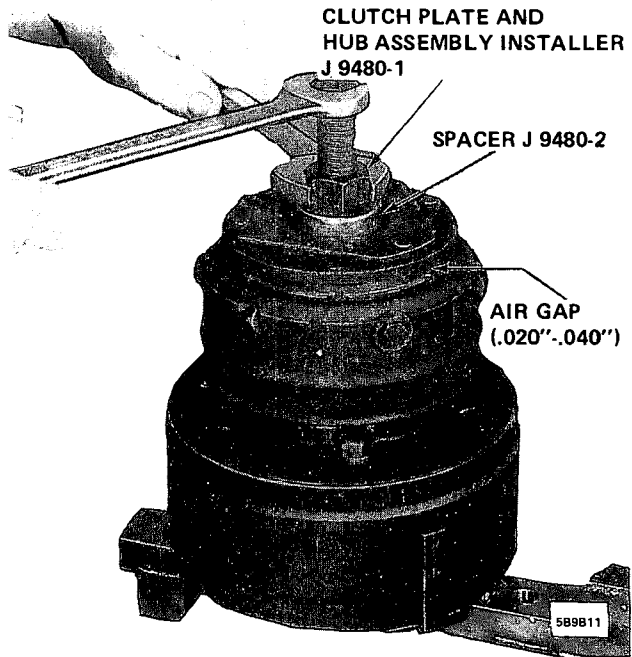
B-34 - Installing Clutch Plate and Hub Assembly - 4 Cylinder Compressor
